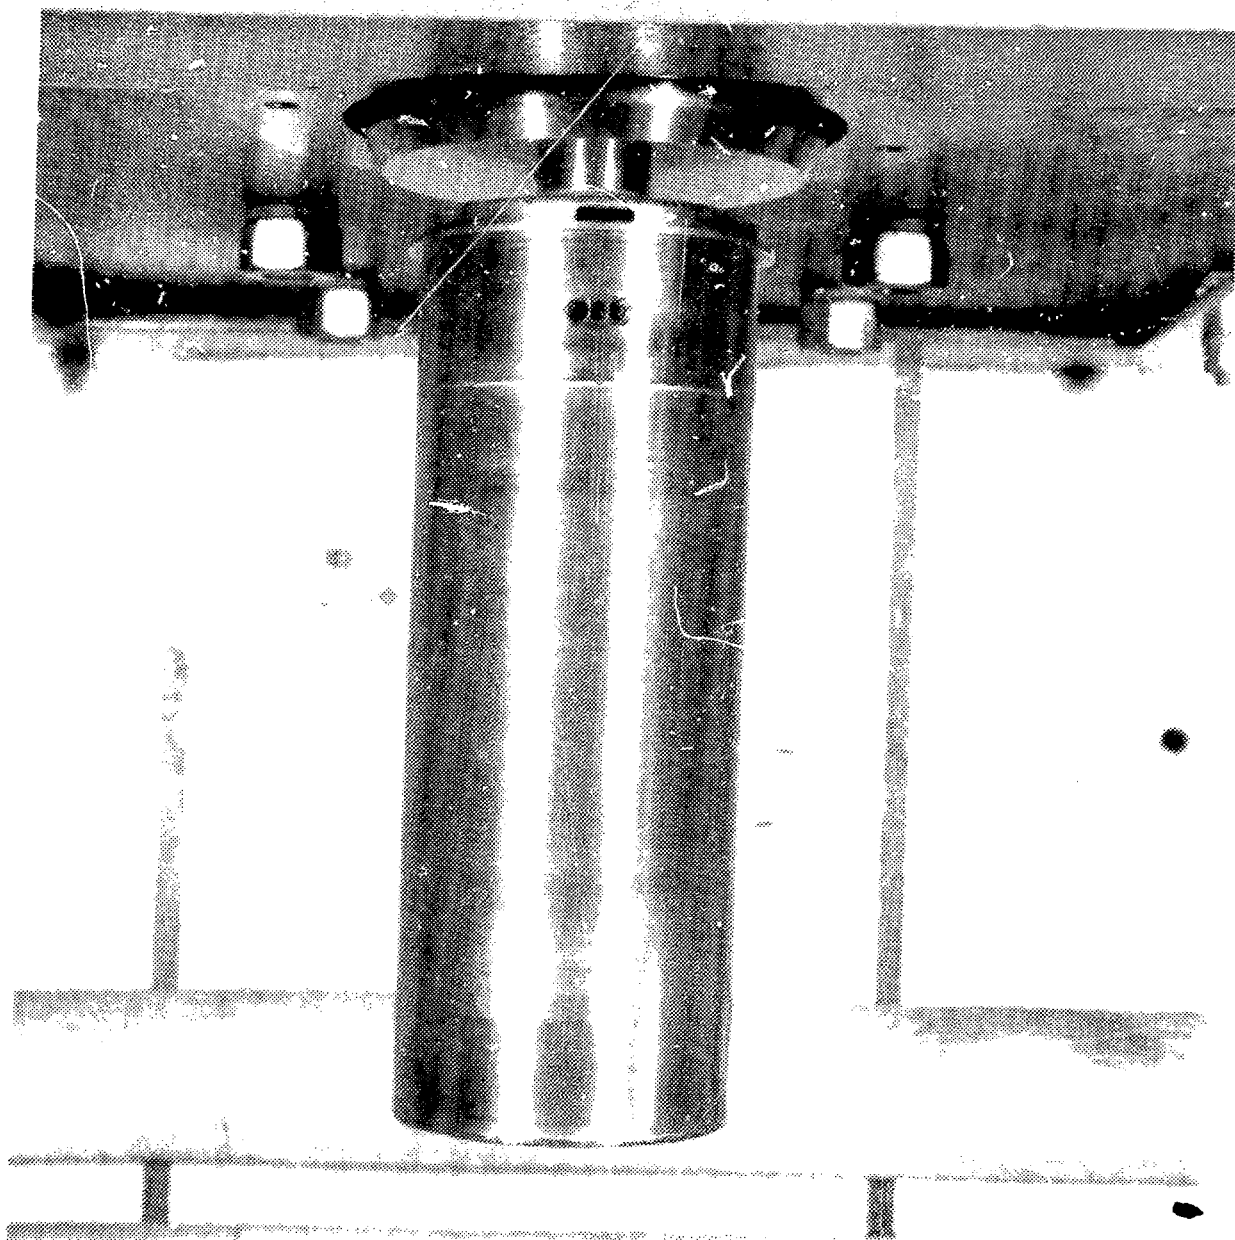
CONTACTOR ROTOR (ANL Photo No. 308-78-26)
